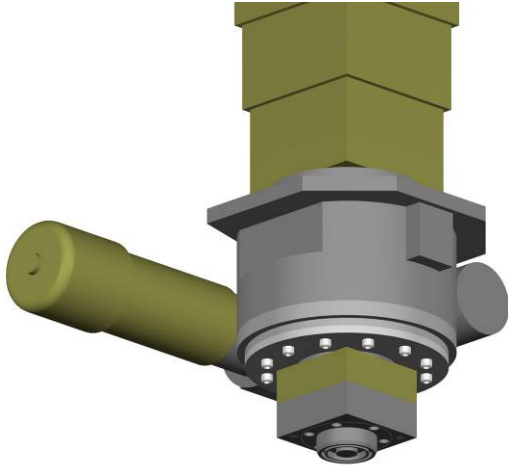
A view of the mast, rotary, compliance, and tool plate equipment.
